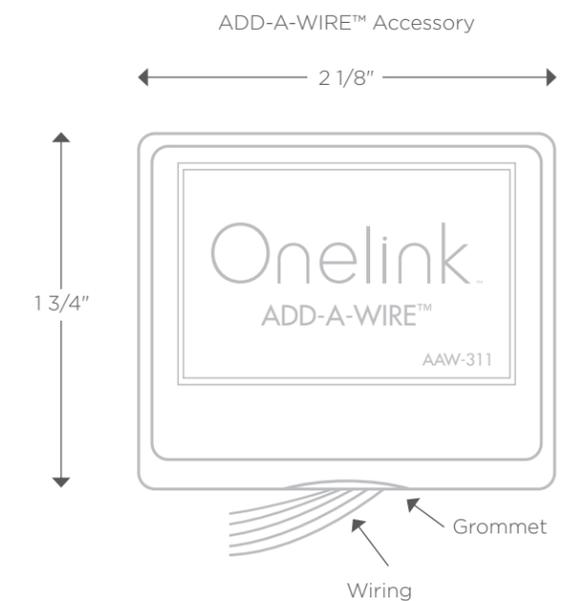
ADD-A-WIRE™ Accessory Mounting
